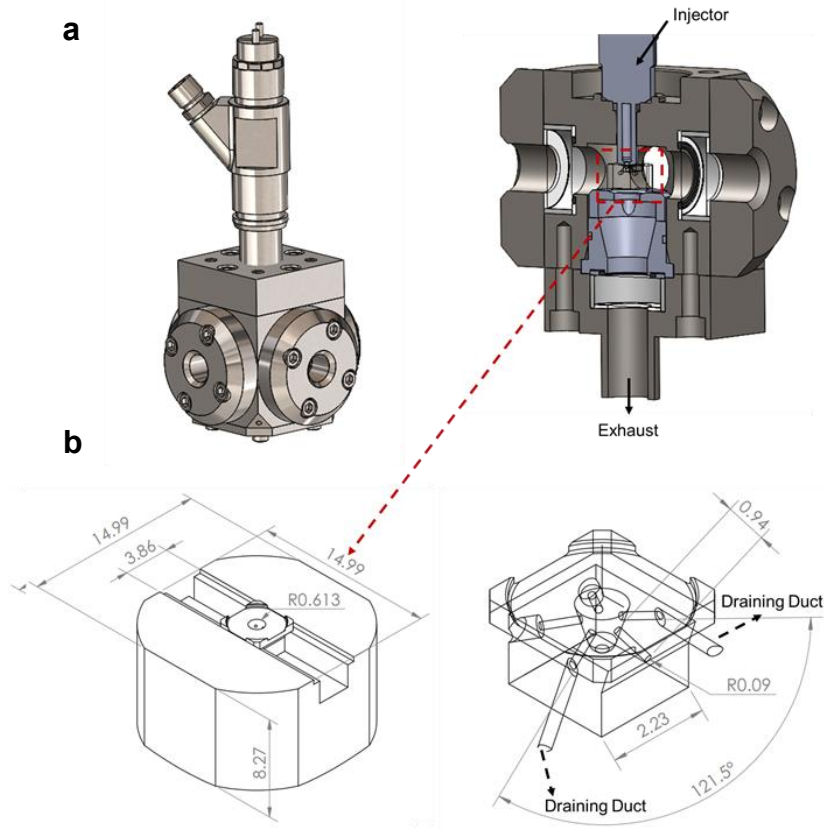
(a) Overall and section views of the spray chamber employed in the experiments. (b) CAD assembly of the Spray-M test piece with the dedicated acrylic pedestal. All dimensions are in mm.
